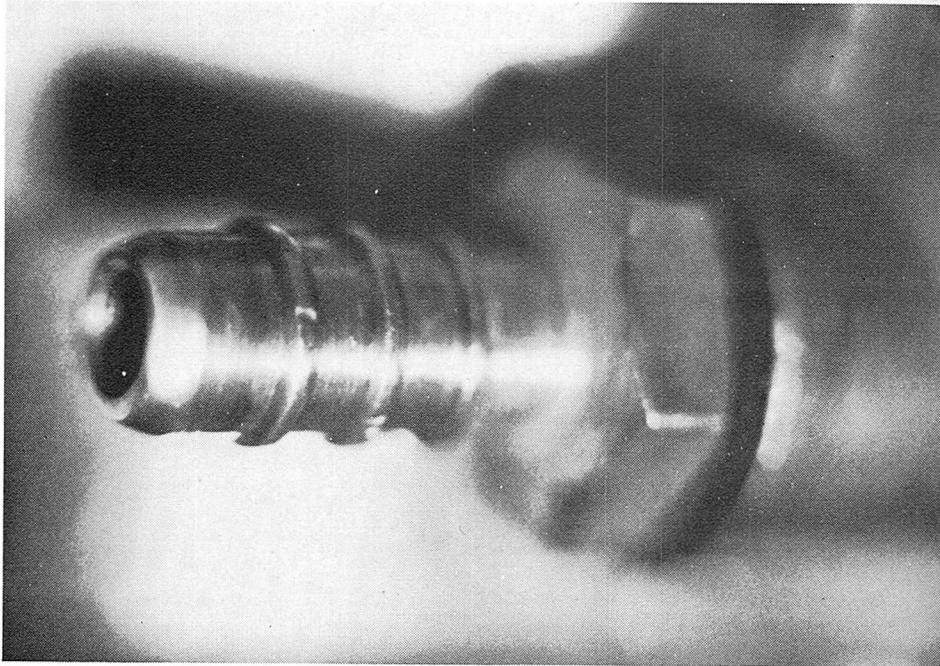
Stock fuel tap outlet fitting shown at left is held in place on the fuel tap body by a threaded ring. A replacement with larger ID was found at an auto parts store. The stock fuel tap has two mesh fuel filters, one above and one below. The lower mesh part of the stock outlet was lost in the conversion.
